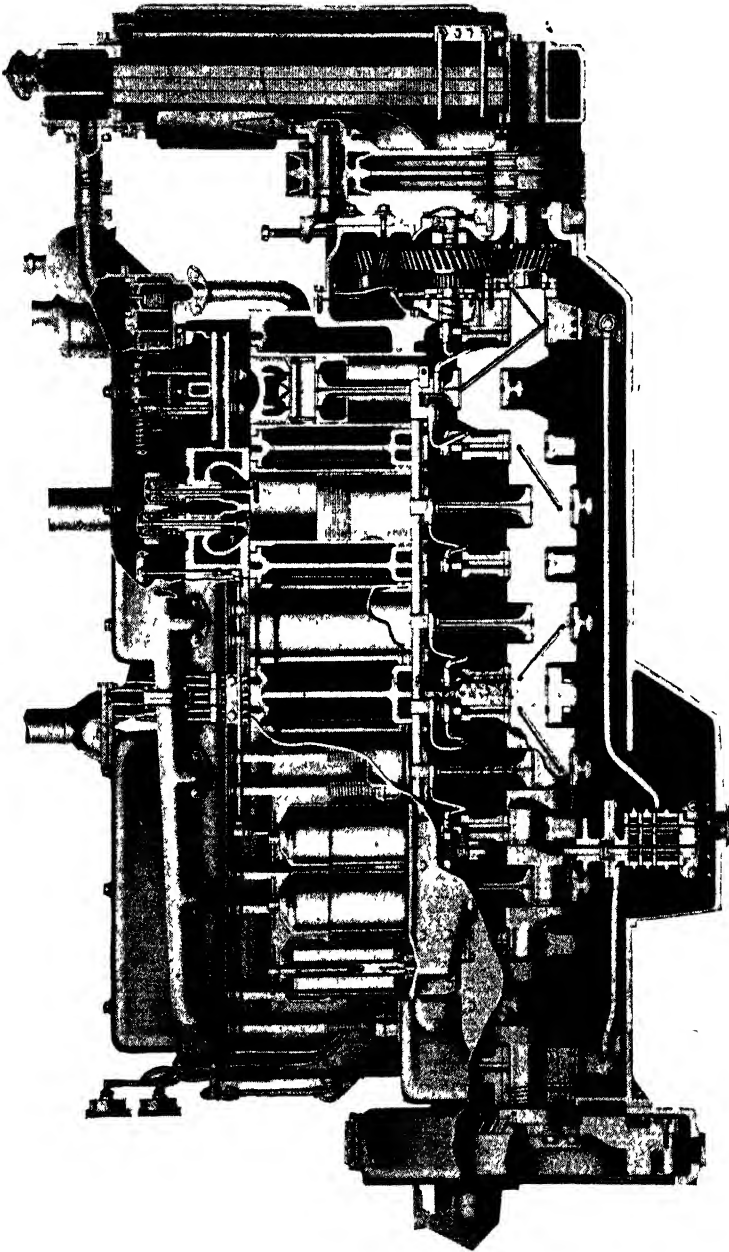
CUTAWAY VIEW OF CATERPILLAR 145-HP DIESEL ENGINE.
